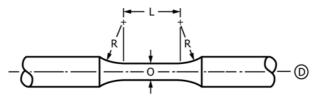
Specimens With Tangentially Blending Fillets Between the Test Section and the Ends
